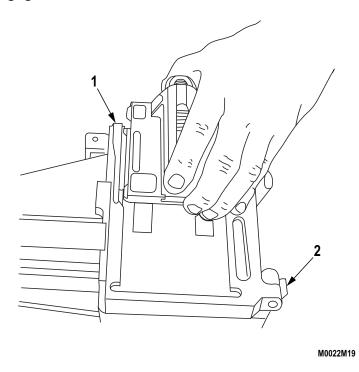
Feed Tray and Feed Slide Assembly Installation.
